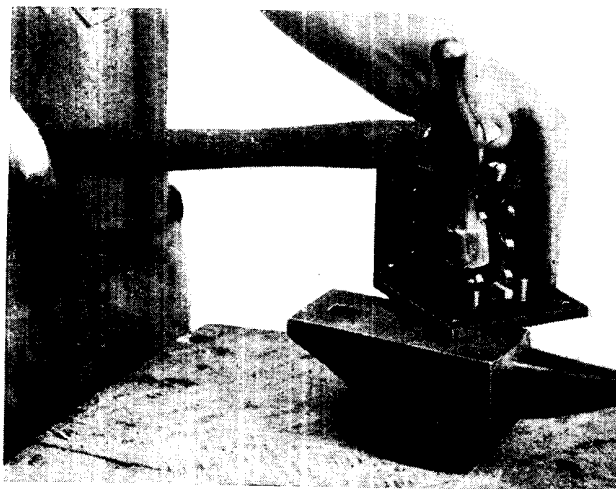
Ebonite is used for the knob and the seating of the contacts, which are shown ready for mounting to the arm
